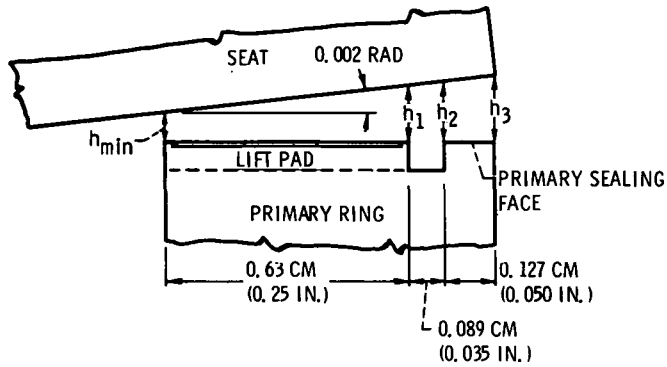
Two-milliradian deformation of seal seat causing nonparallel faces in primary seal.
